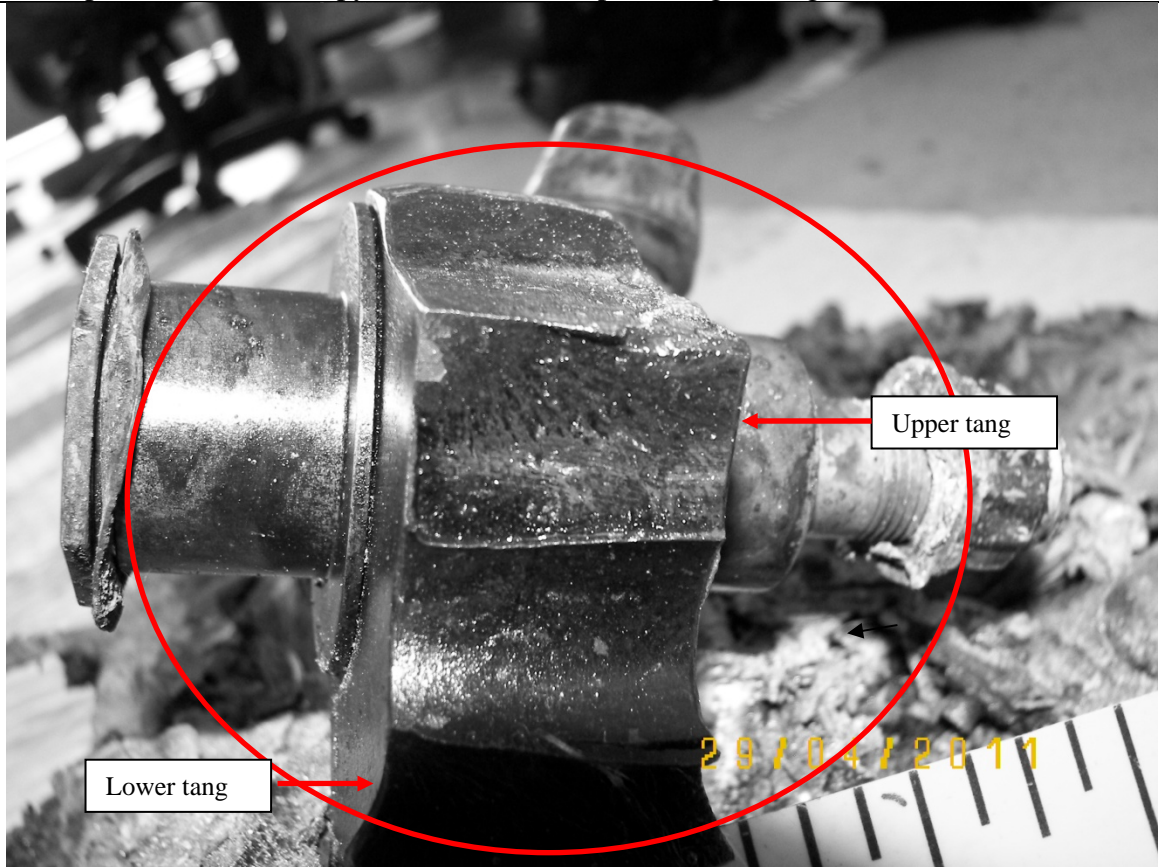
Number two pylon Inboard mid-spar fitting mating fracture surface
